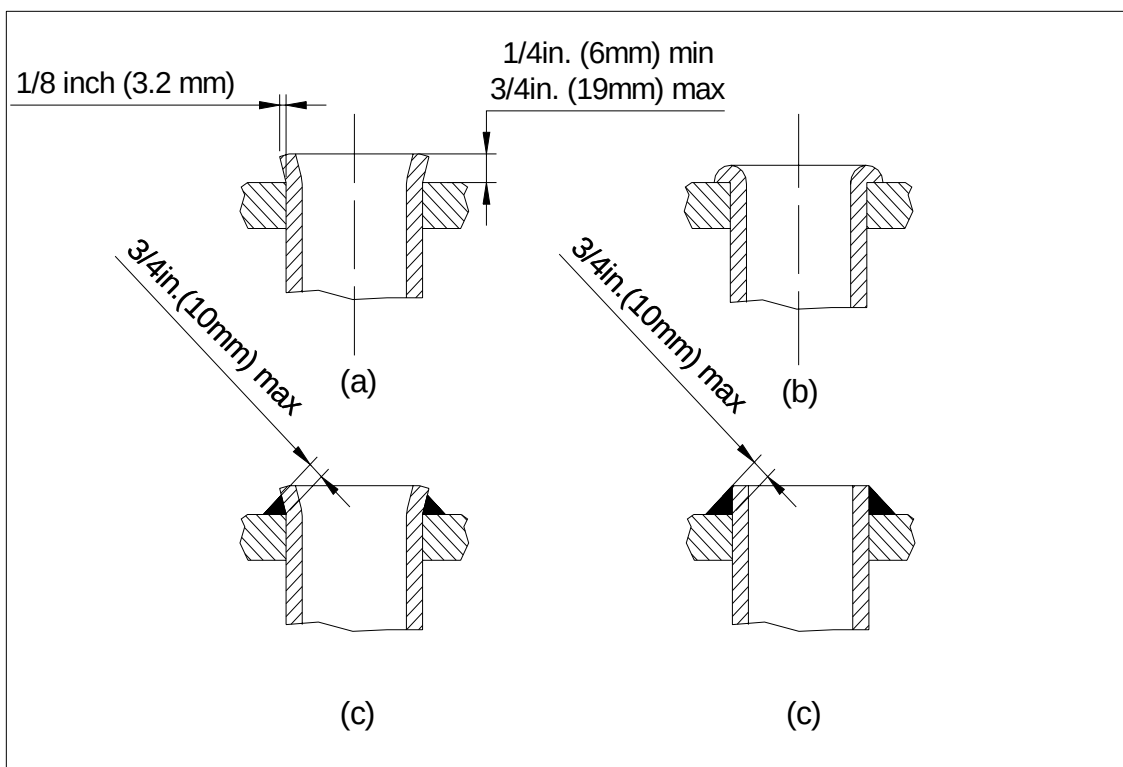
EXAMPLES OF ACCEPTABLE FORMS OF TUBE ATTACHMENT
